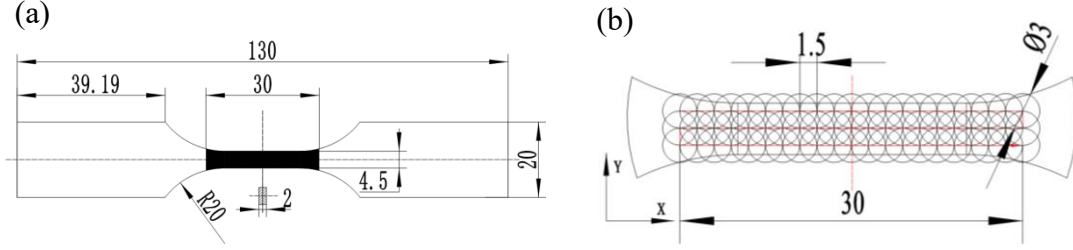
(a) Dimension of tensile sample (b) Partial enlargement drawing of the treated area subjected to LSP (mm).
